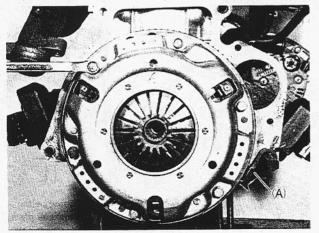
(A) Flywheel holder (Special tool 09924-17810)
